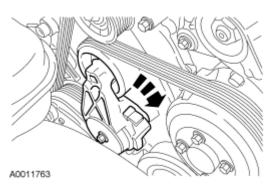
Rotating Tensioner Clockwise Courtesy of FORD MOTOR CO.
